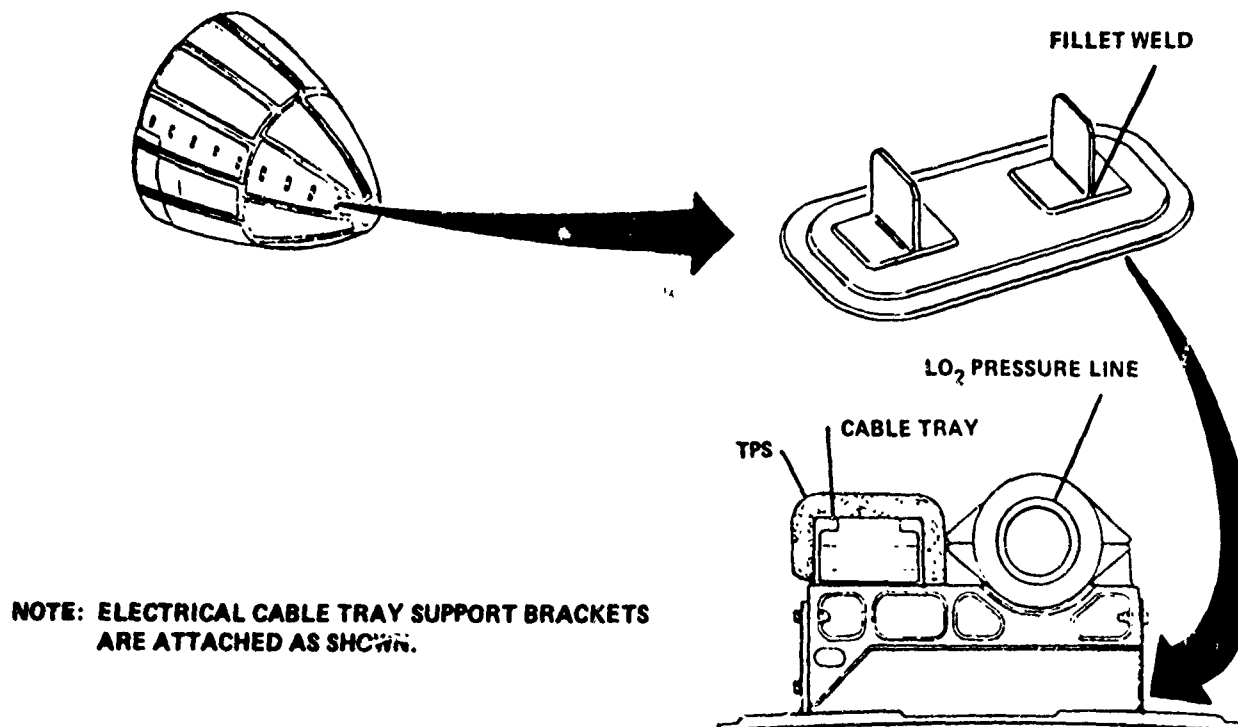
SKIN PAD AND WELDS ON TANK FORWARD AND AFT GORE SECTIONS
